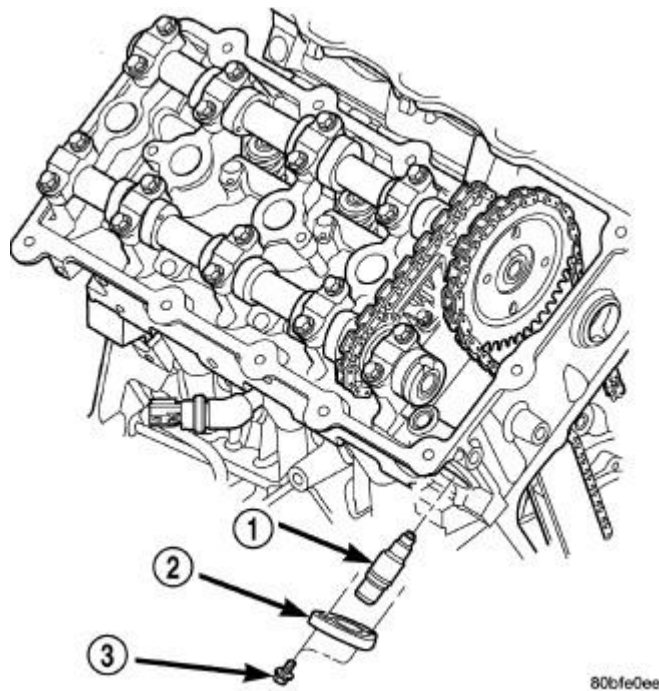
PRIMARY TIMING CHAIN TENSIONER
